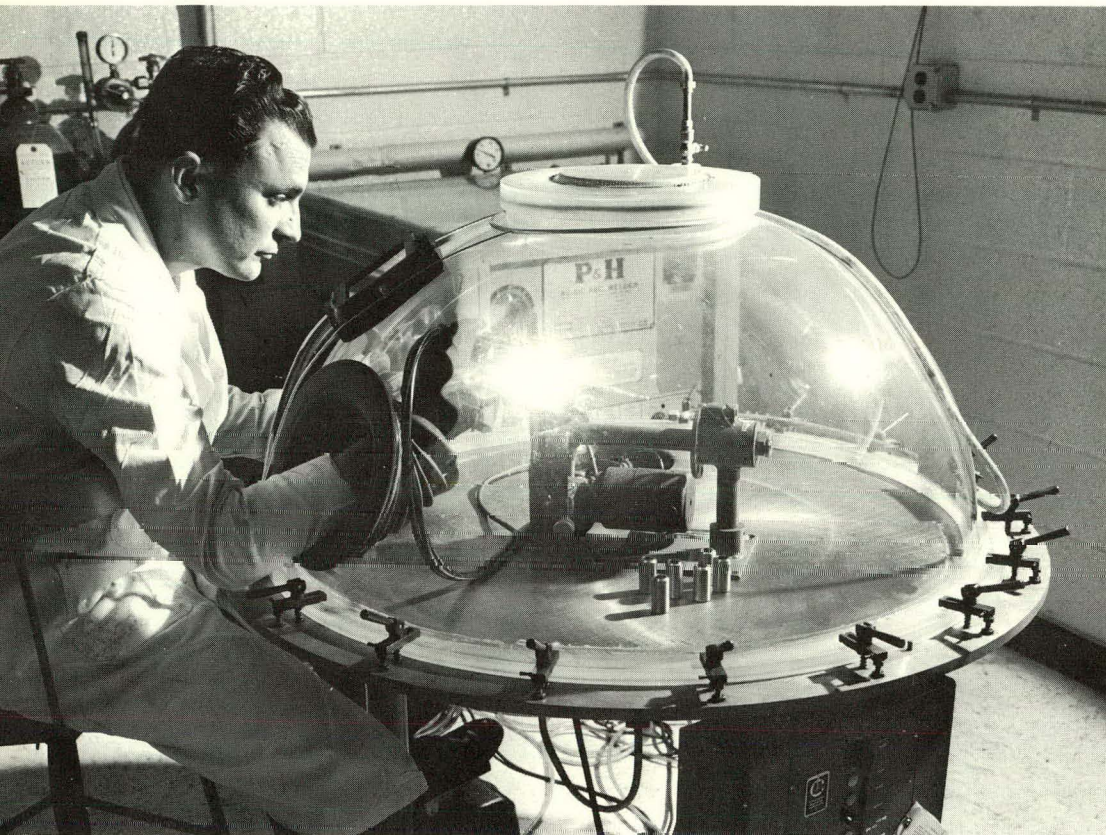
Welder utilizing the inert gas chamber installed in the clean welding facility.
